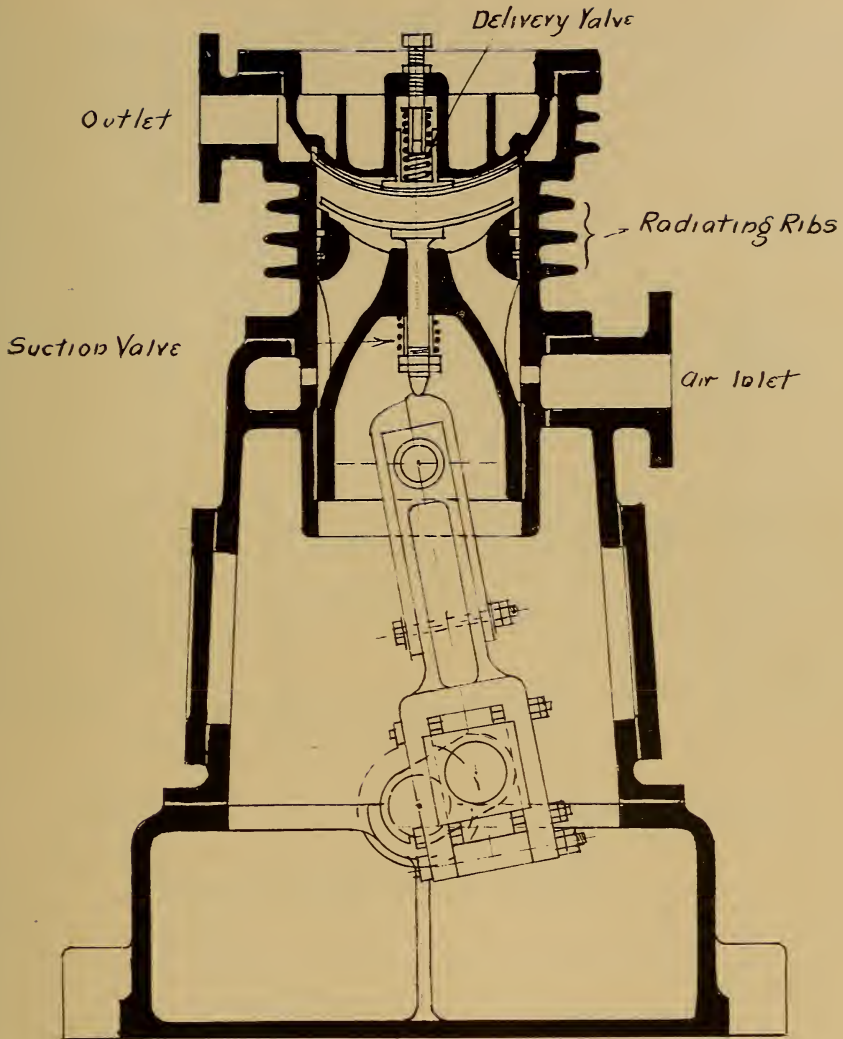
SECTIONAL VIEW OF SCOTT SINGLE-ACTING AIR COMPRESSOR.
